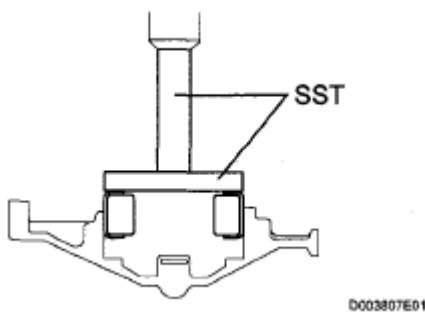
Installing Underdrive Cylindrical Roller Bearing
